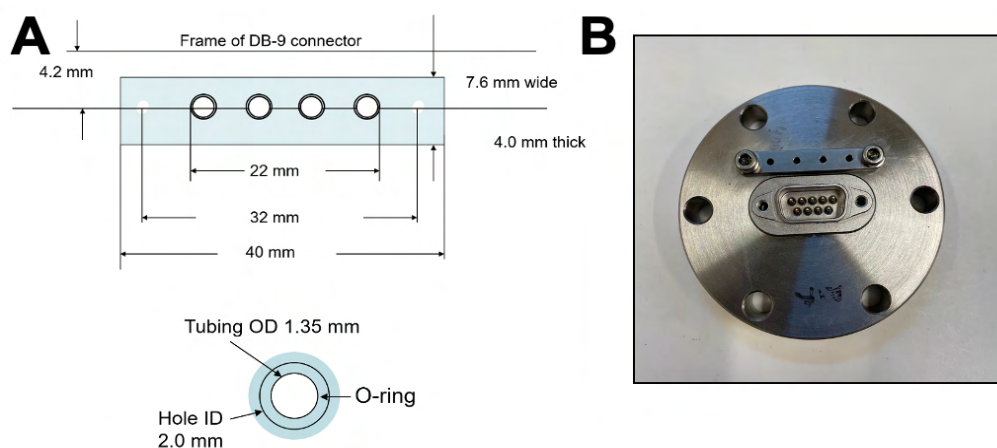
Use of a keeper piece for a vacuum tight seal of the Tefzel tubes. (A) detailed design of stainless-steel keeper used to seal the feed through holes in the 2.75-inch flange. (B) 2.75-inch flange showing the feed through holes with the keeper piece and the 2-sided DB9 connector, mounted on the same flange.
